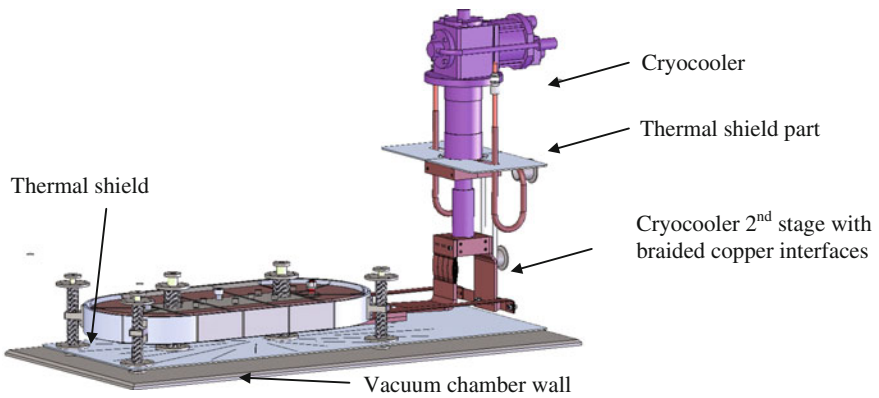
Bolt-on design (vacuum chamber open for clarity), directly to cold plate and race track cold mass with lead in/out
